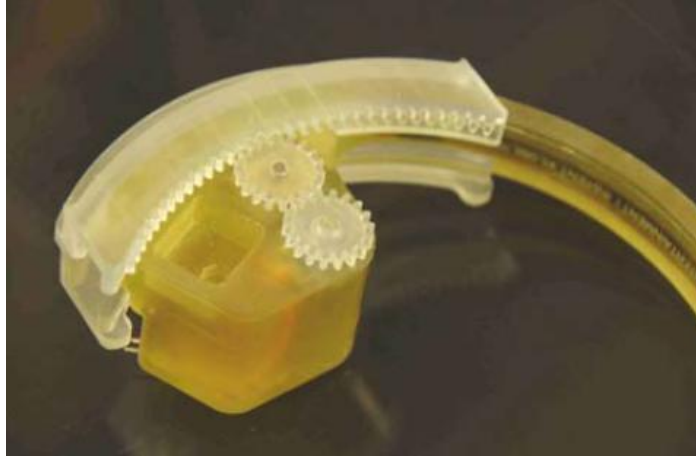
Photo of first assembled prototype with embedded components including dc motor and rotary potentiometer.
